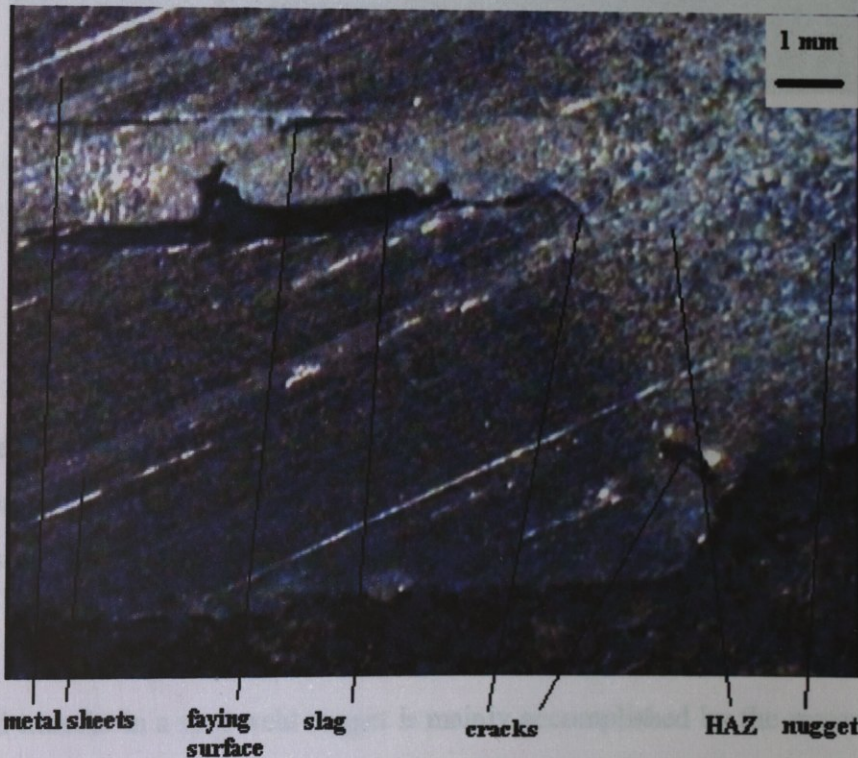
Cracks in nipper spot-welded MTS specimen (focused at one edge)
